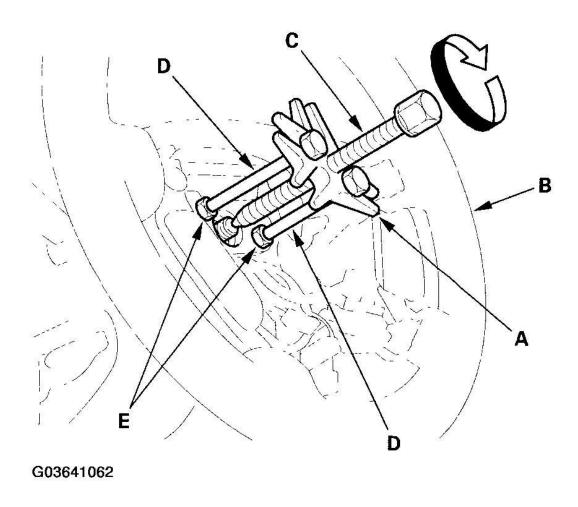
Installing Steering Wheel Puller On Steering Wheel Courtesy of AMERICAN HONDA MOTOR CO., INC.
